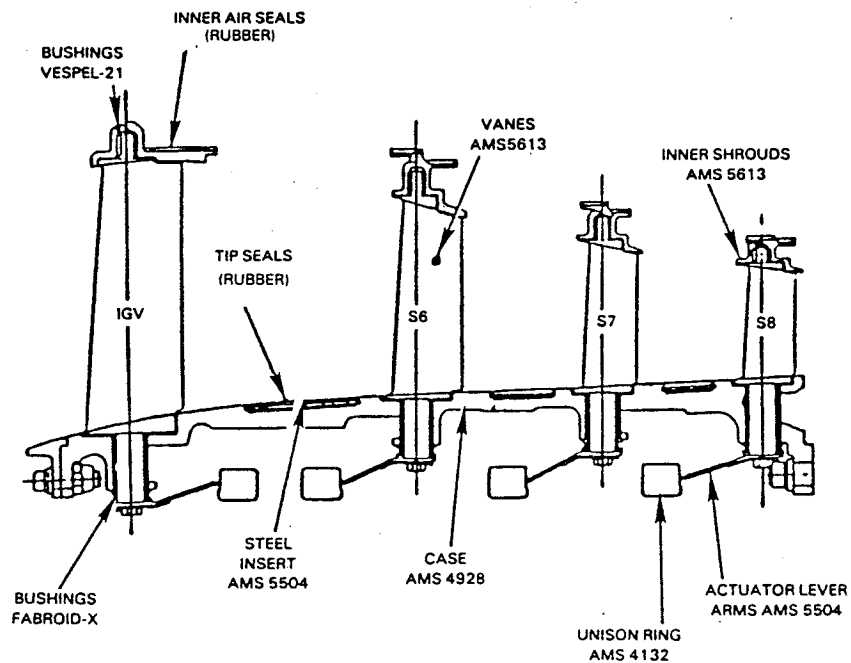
High-Pressure Compressor Front Case and Stator Assembly Materials
